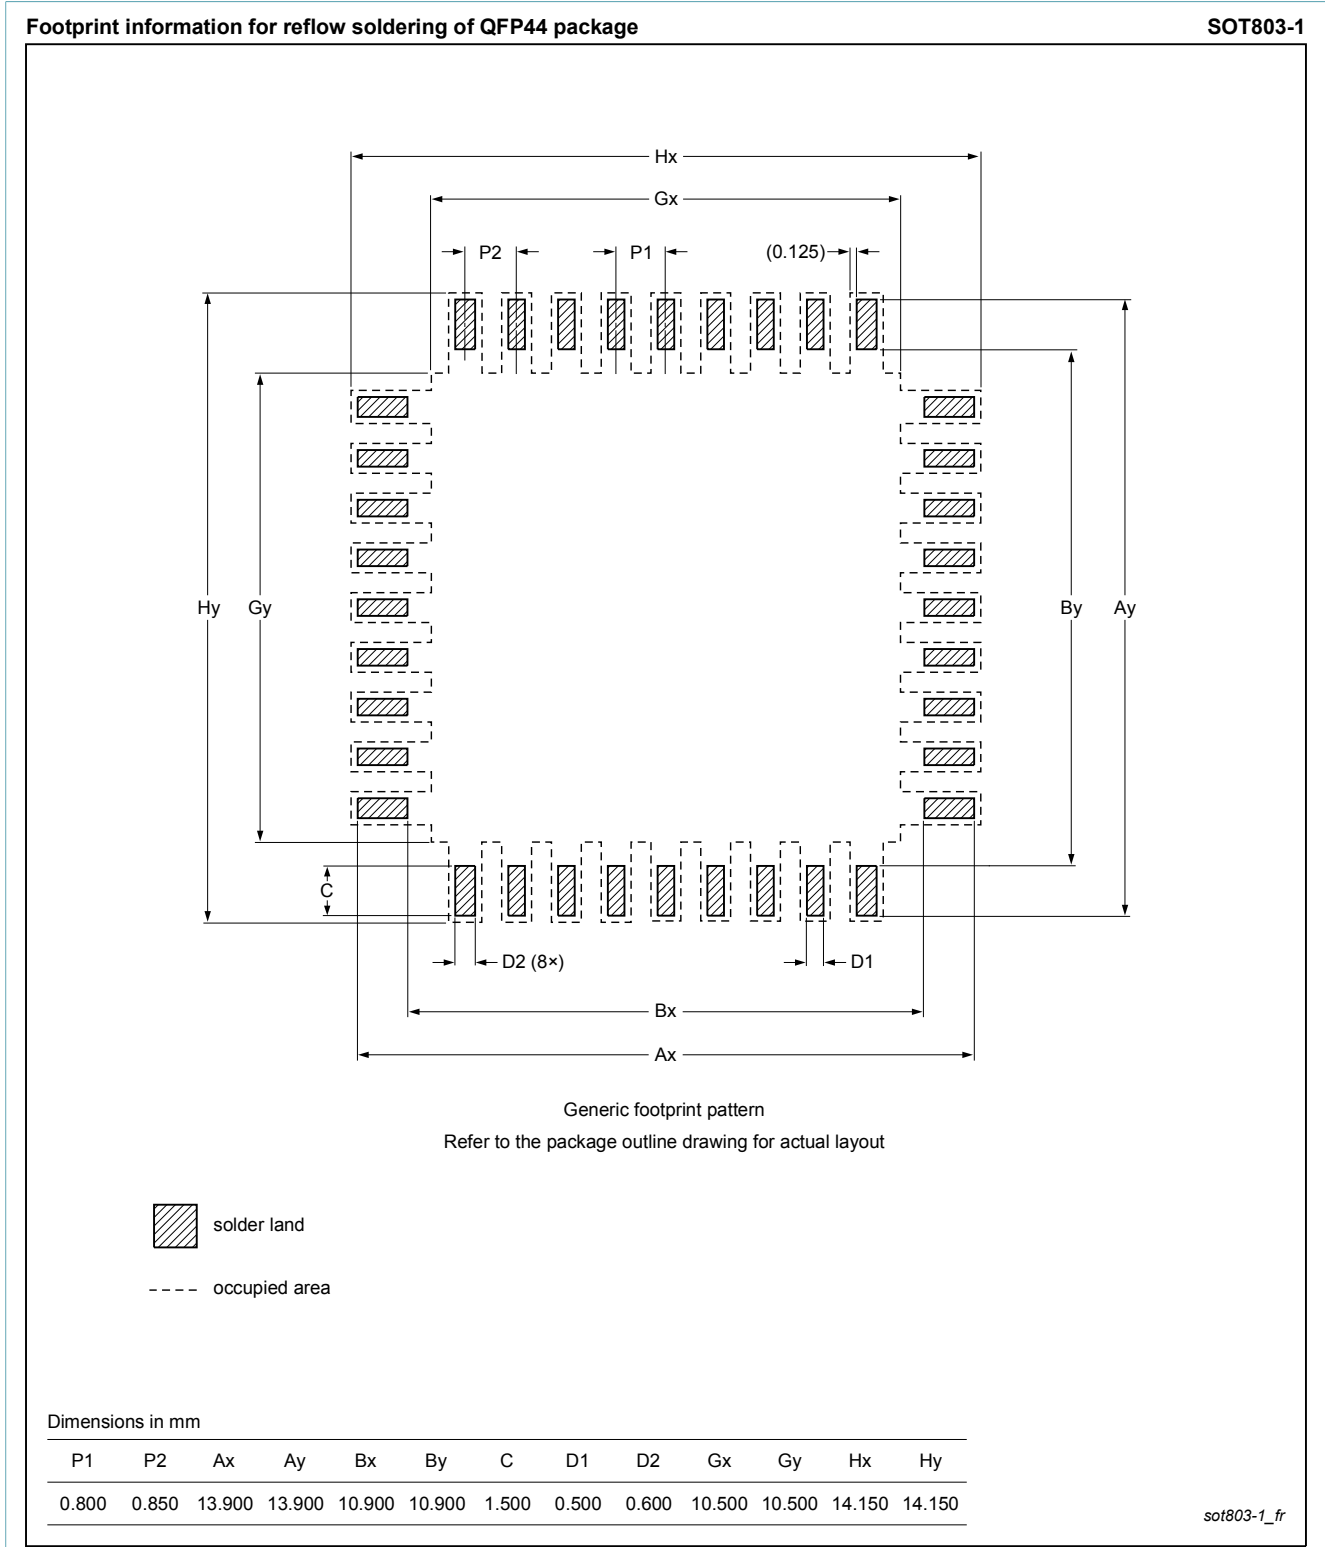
Reflow soldering footprint for QFP44 (SOT803-1)
